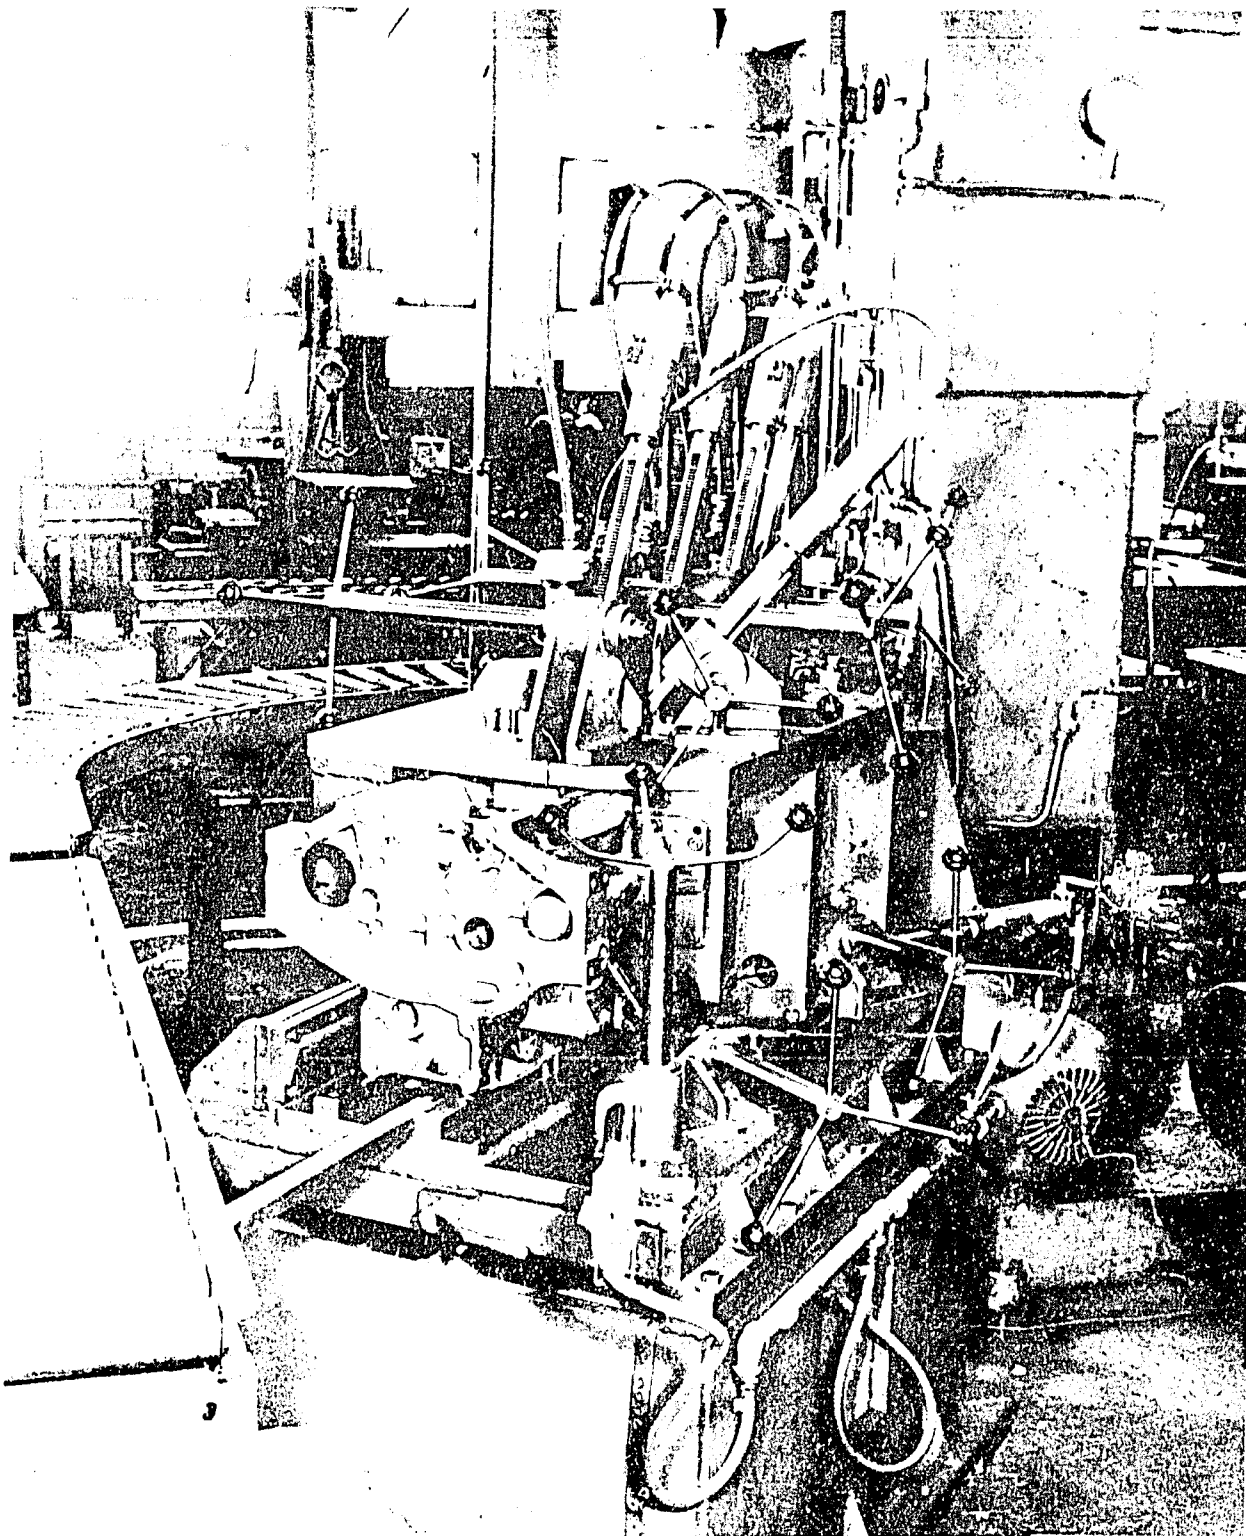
Special machine and holding fixture for drilling angular holes in crankcase-end of cylinder block.
